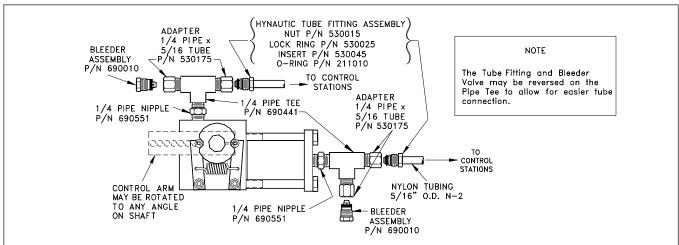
SS-04 Shifter Slave - Bleeder Valve and Tubing Adapters Installation
